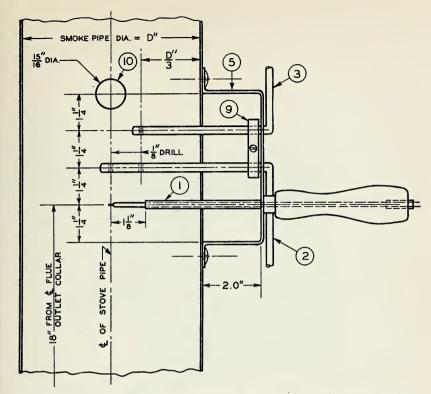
Gas-sampling and draft tubes, thermocouple, and support bracket assembly.
